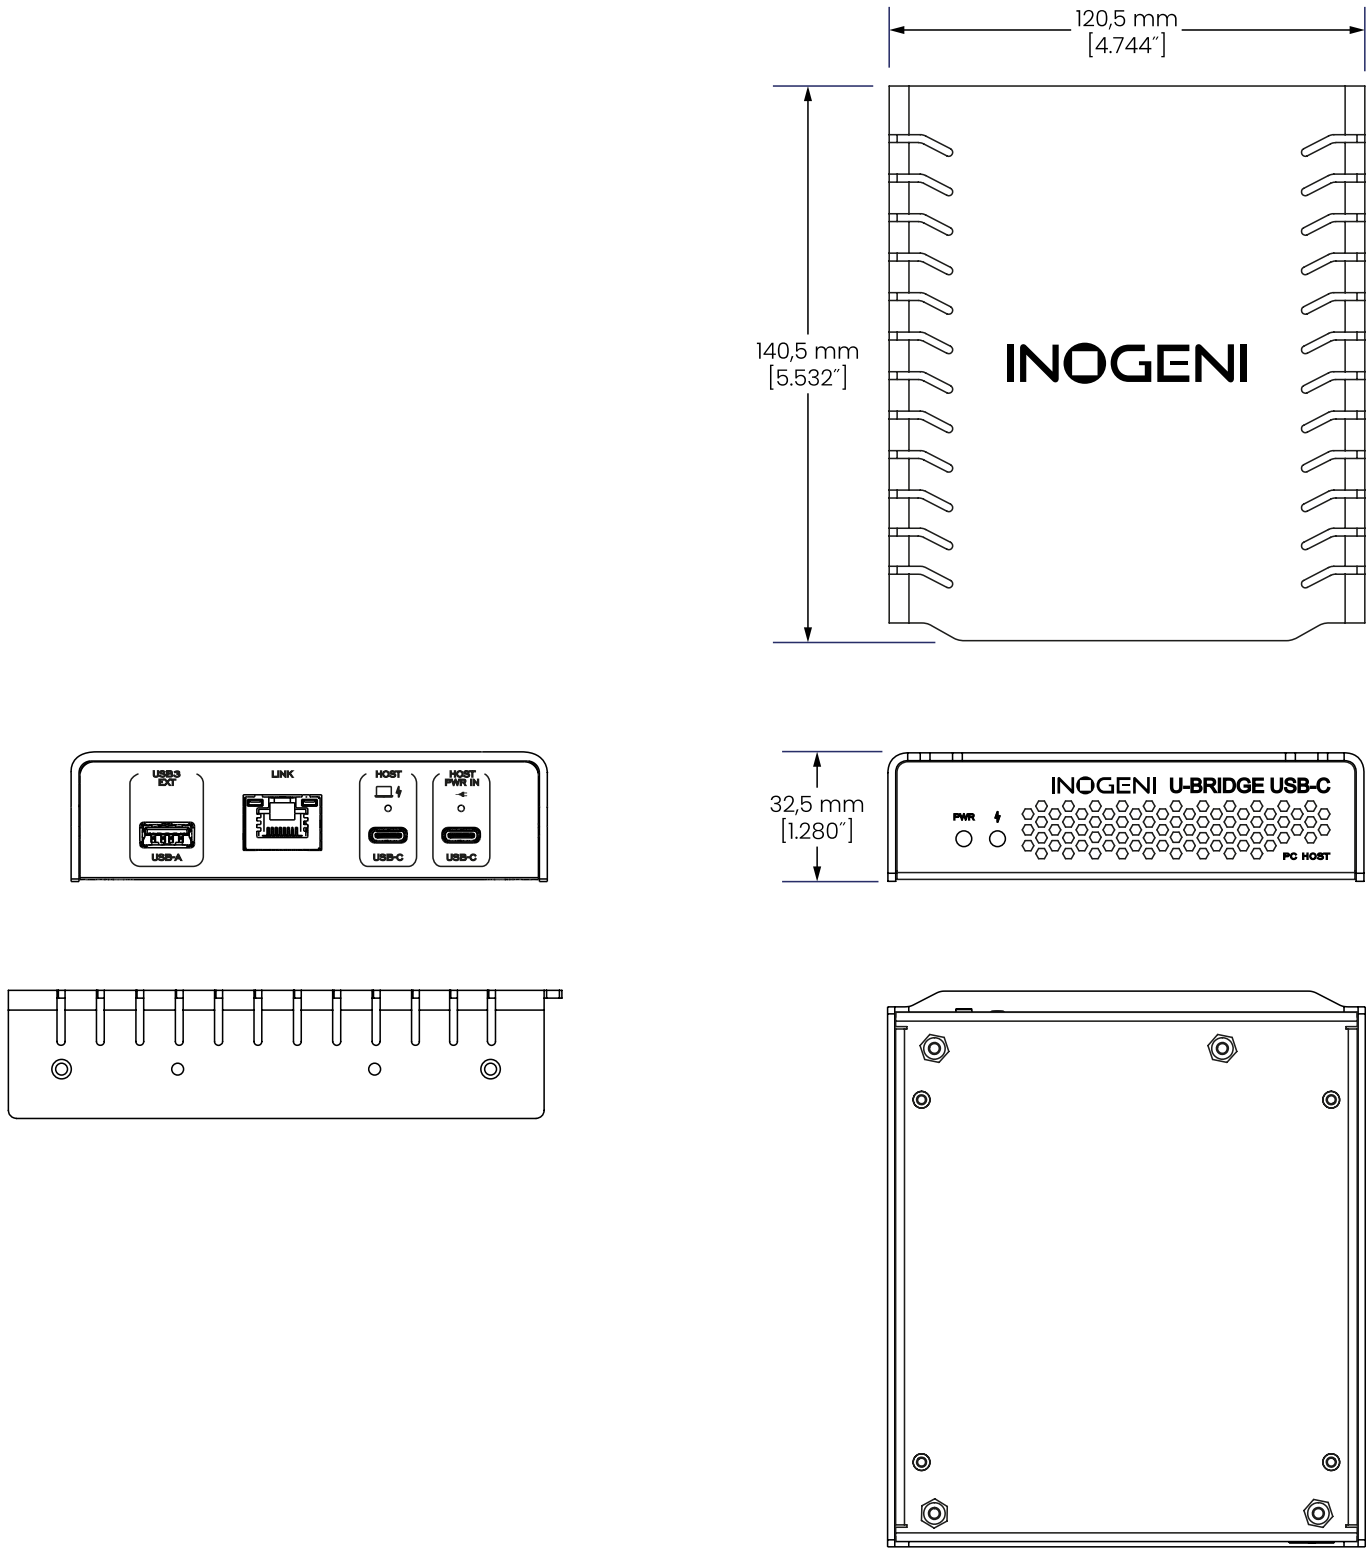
Bottom plate dimensions and holes positions of PC HOST hub – SINGLE variant
